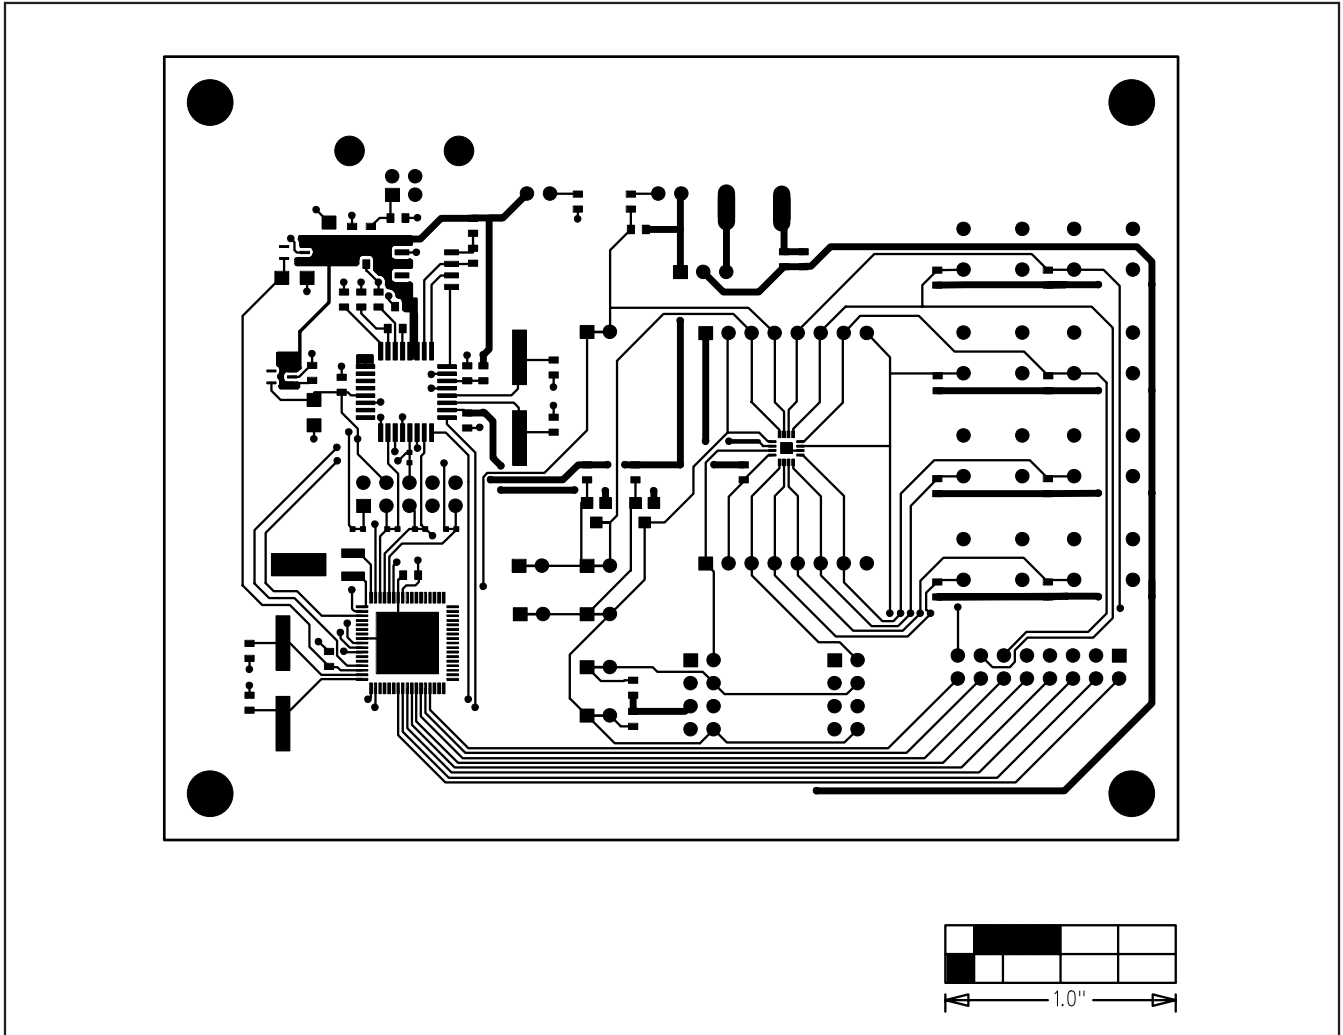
MAX7319 EV Kit PCB Layout—Component Side
